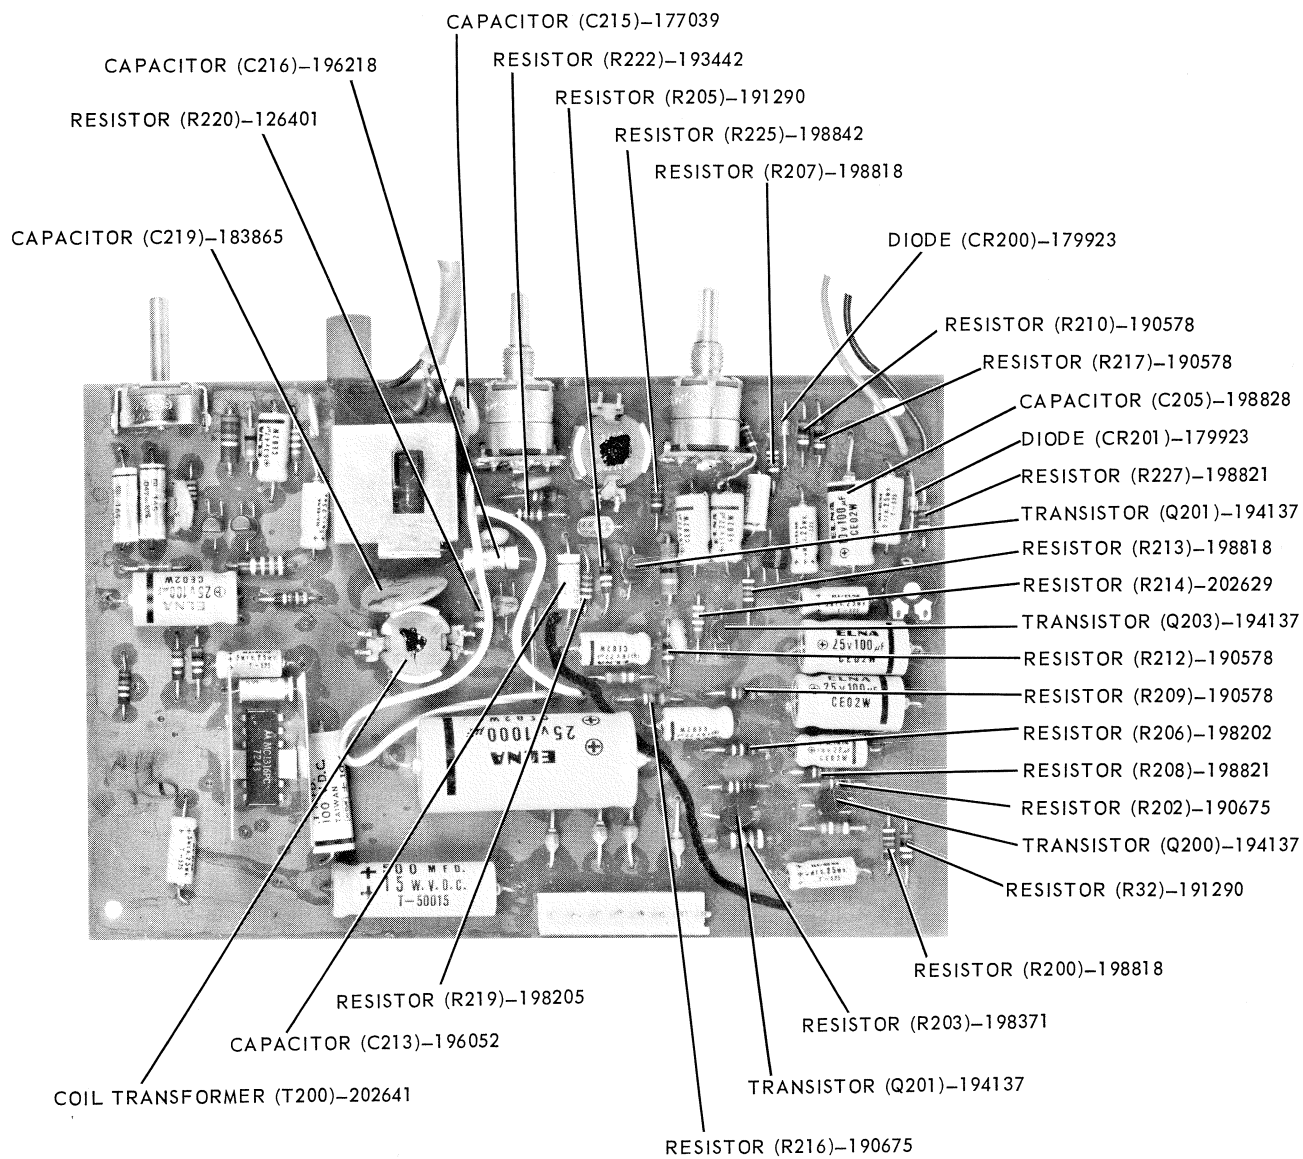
PLAYBACK PRINTED CIRCUIT BOARD ASSEMBLY (MODEL 235)-204778
